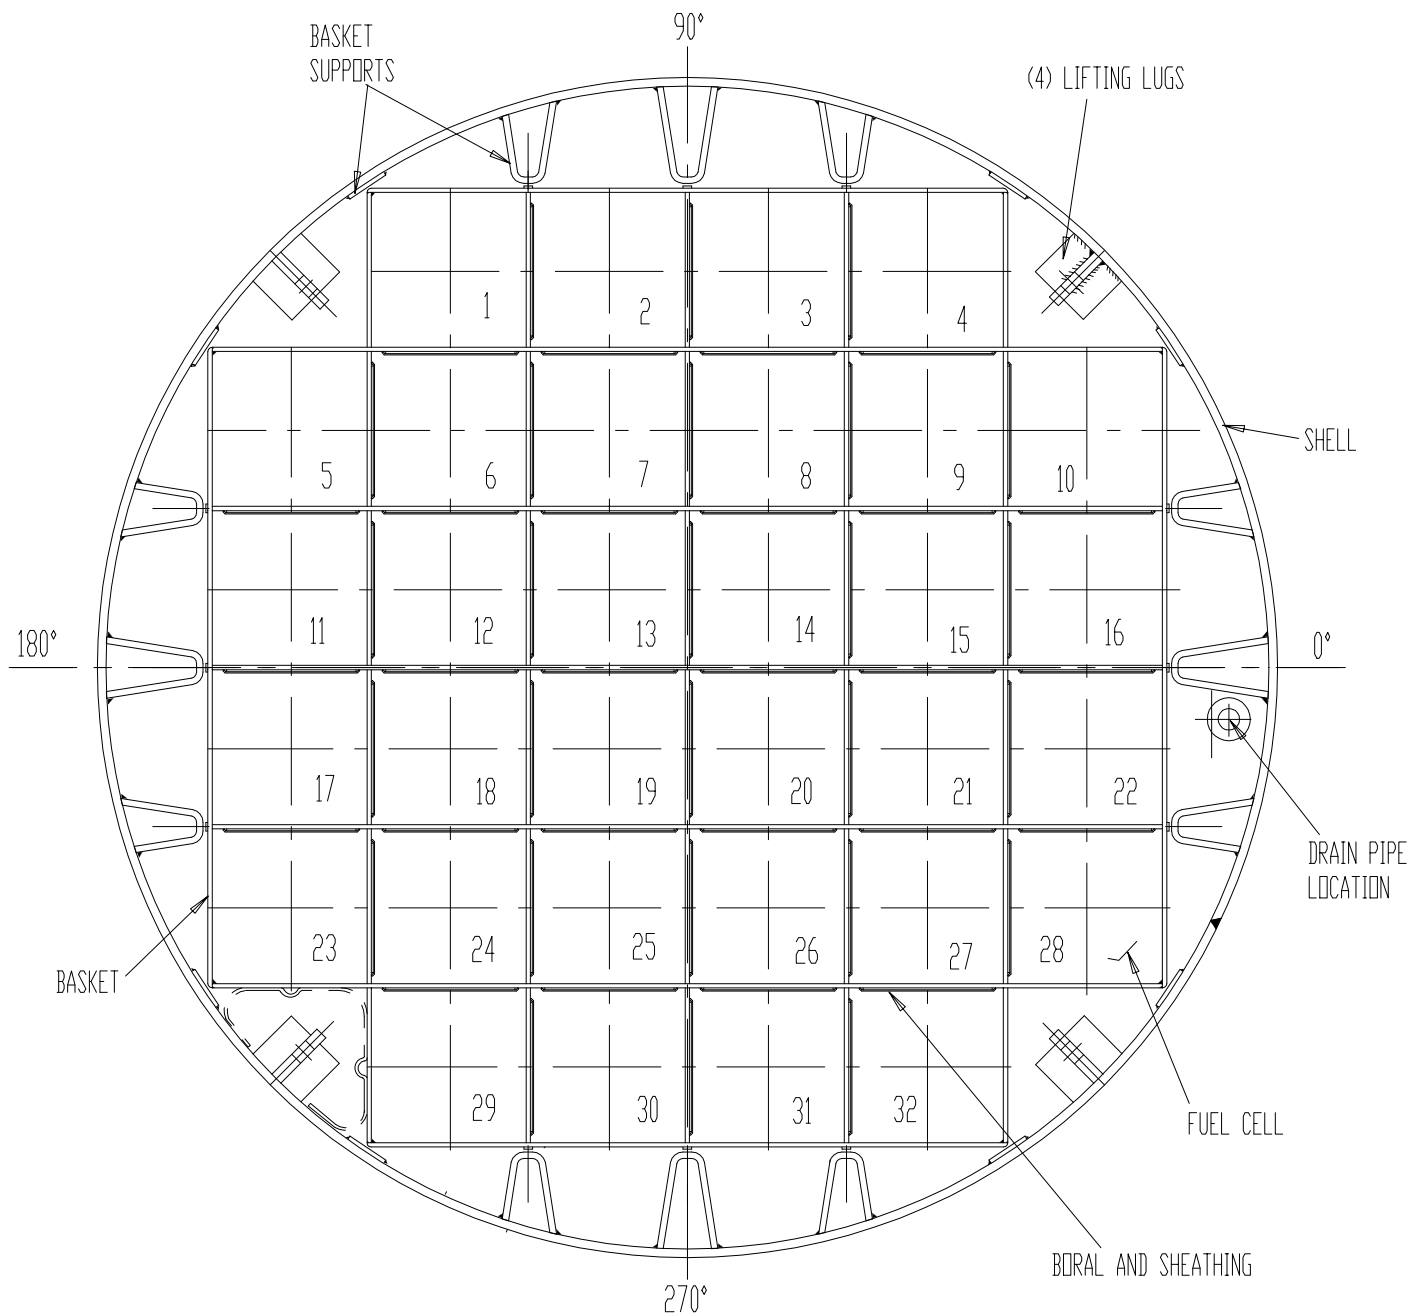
; MPC-32 CROSS SECTION VIEW
